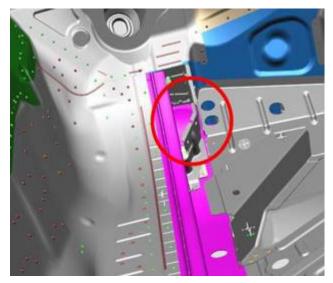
Cut-away drawing of the inside of the longitudinal member.
